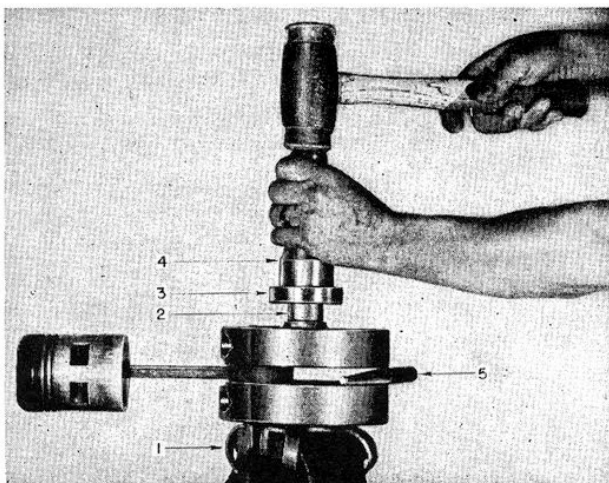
INSTALLING CRANKSHAFT & BALL BEARING
